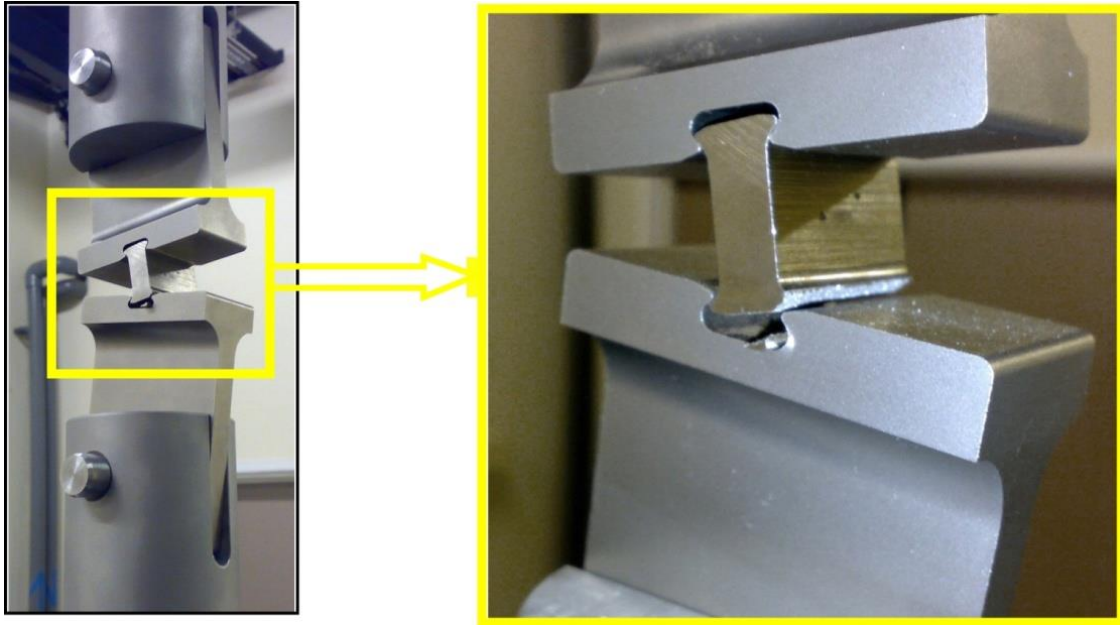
Fatigue failure generated at one dovetail lobe.
